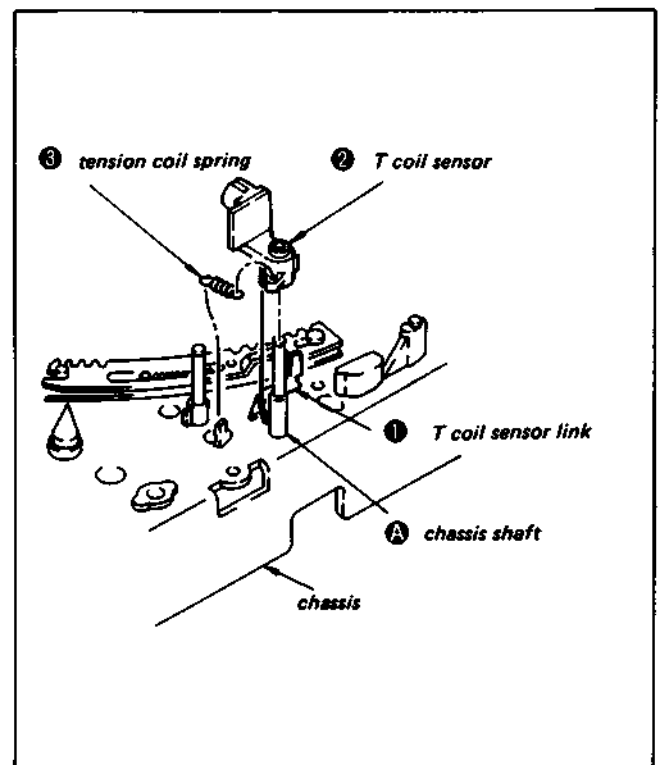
T coil sensor link and T coil sensor mounting.
